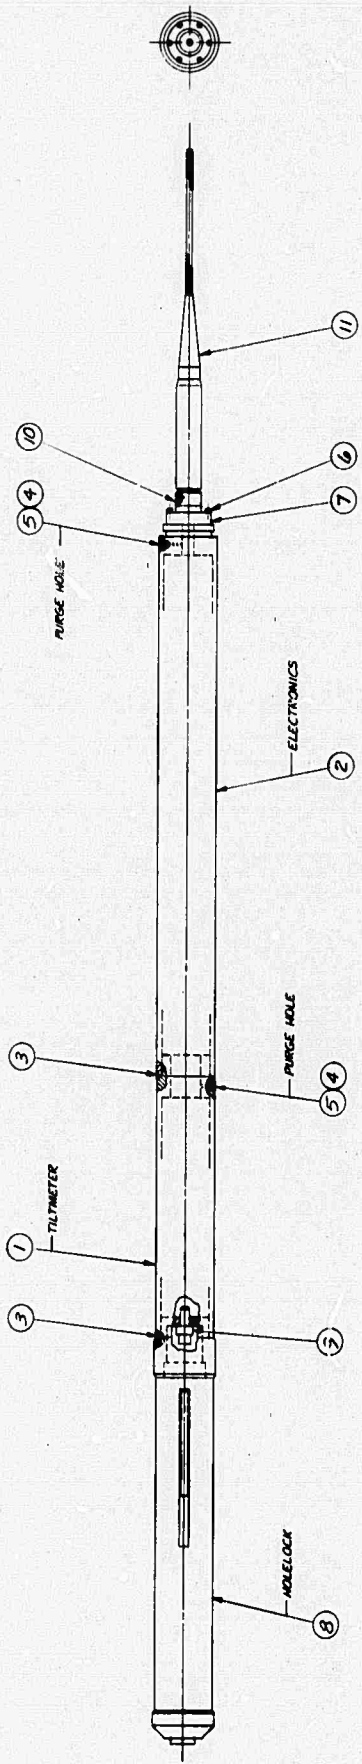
ASSEMBLY DRAWING OF THE DOWNHOLE UNIT
